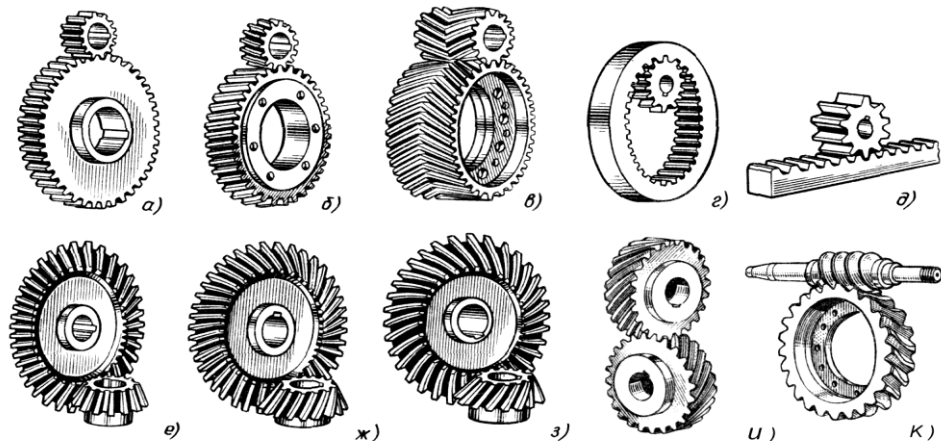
Types of gearing: а, б, в – spur gears with external gearing; г – spur gear with internal gearing; д – rack and pinion gear; е, ж, з – bevel gears; и – helical gear; к – worm gear.
